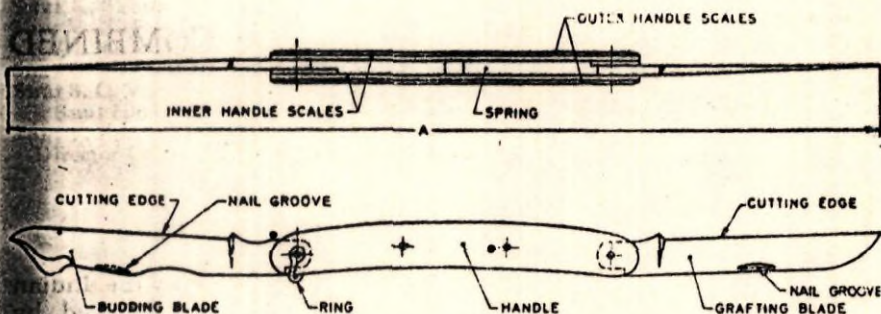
ASSEMBLY OF BUDDING AND GRAFTING KNIFE, COMBINED
